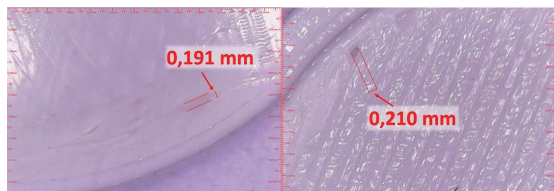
Printed sample after successful calibration of extrusion width parameters. (left) Bottom surface. (right) Top surface of the bottom.
